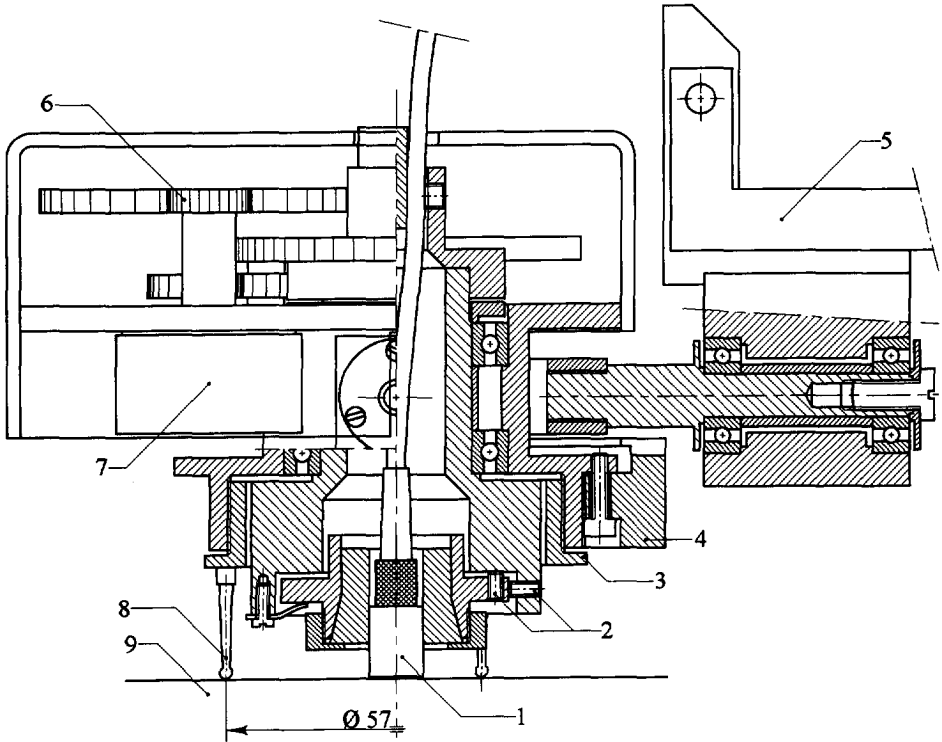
Sketch of transducer holder, showing transducer (1), screws for adjusting transducer alignment (2), ring for adjusting transducer-specimen distance (3), counterweight (4), mounting bar (5), gear box (6), stepper motor (7), positioning legs (8) and specimen (9).
